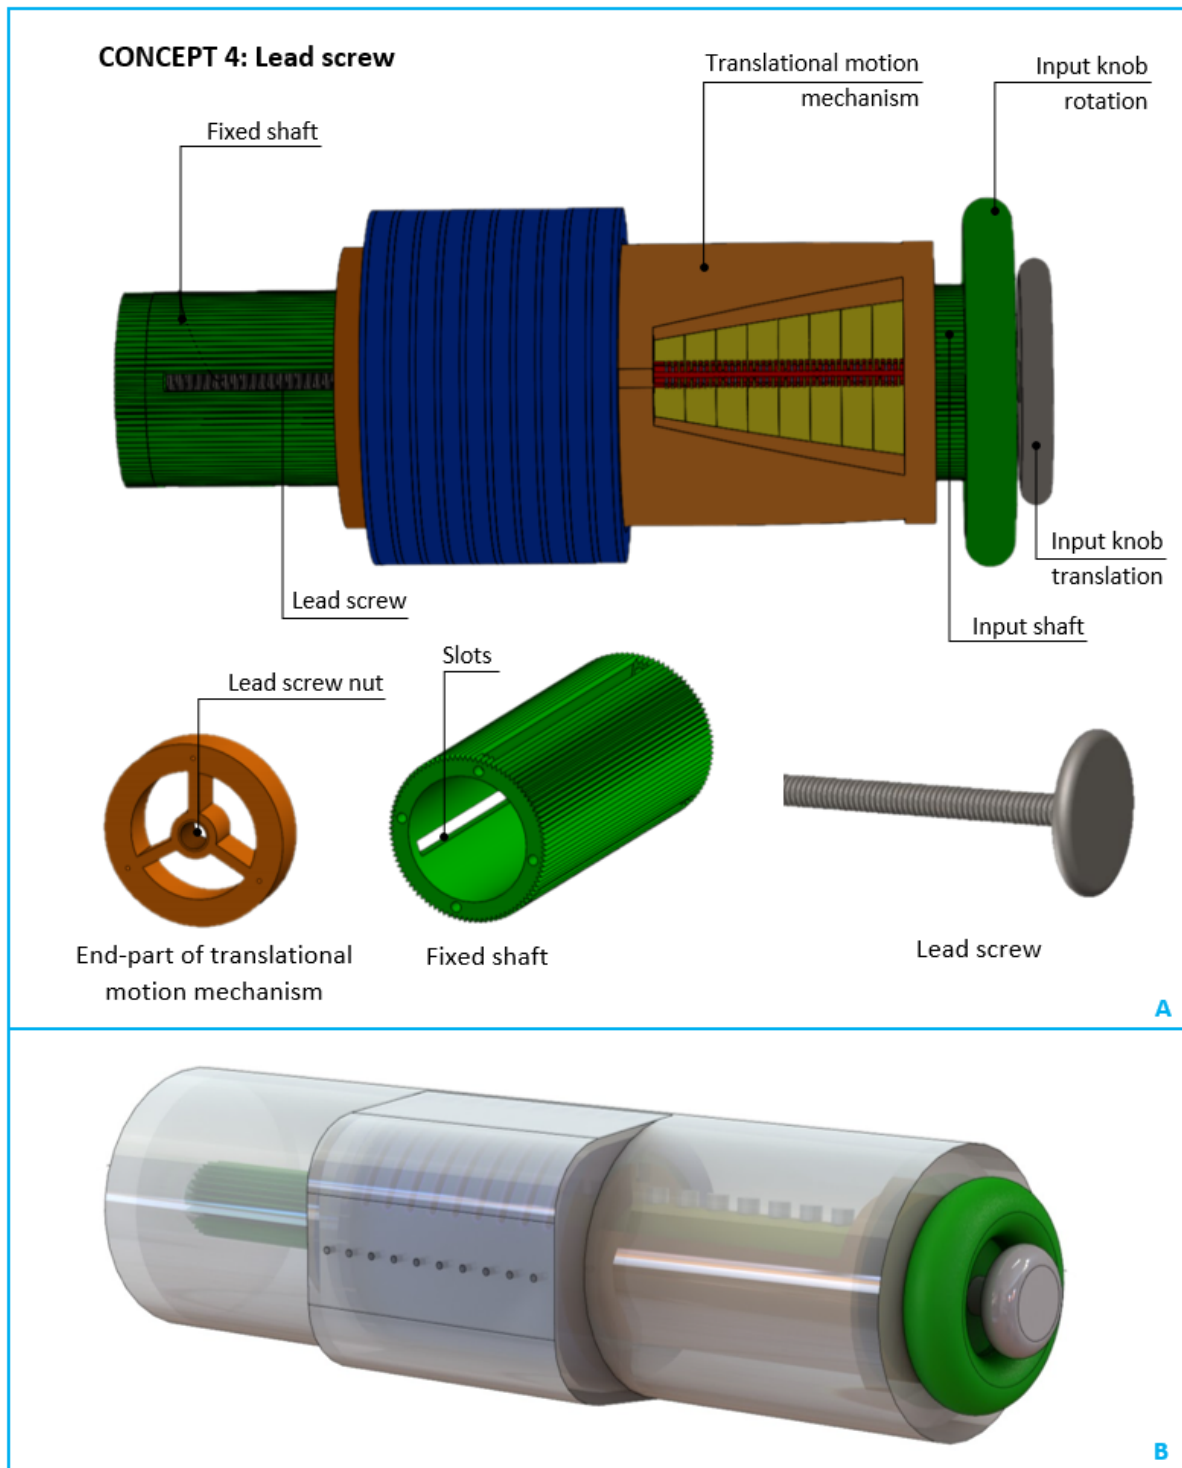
Concept 4: lead screw. Figure A shows the most important parts of this design. Figure B is a CAD drawing of how the design would look with a perspex casing around it. The lead screw is incorporated in the shafts of the prototype. The distal side of the translational motion part includes a lead screw nut, that fits on the lead screw. This requires the fixed shaft to have slots along its length, so the translational motion part can be connected to the lead screw. The user controls two rotational knobs: one for the rotation of the input shaft and memory rings and the other for the translation of the memory rings
